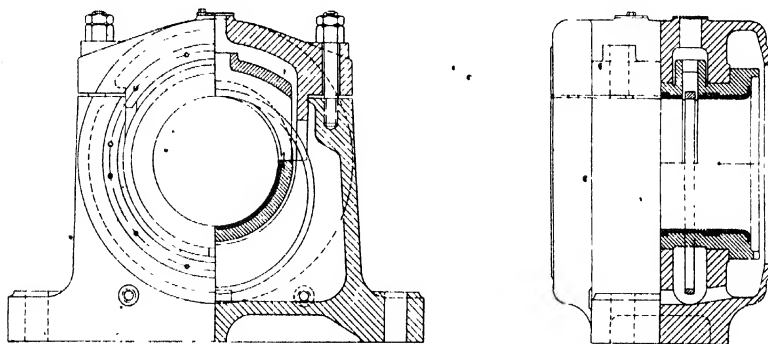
FOUR-PART CRANKSHAFT BEARING WITH RING OILING (*Robey & Co., Ltd.*)
